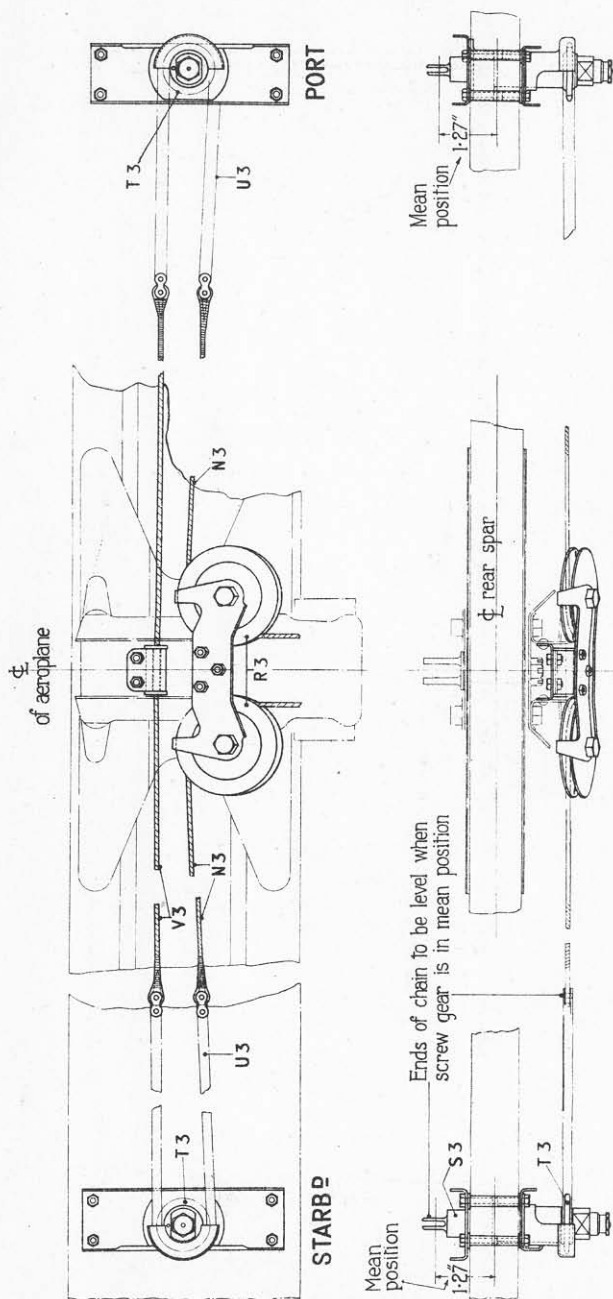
ELEVATOR FLAP CONTROL (IN TAIL PLANE)
